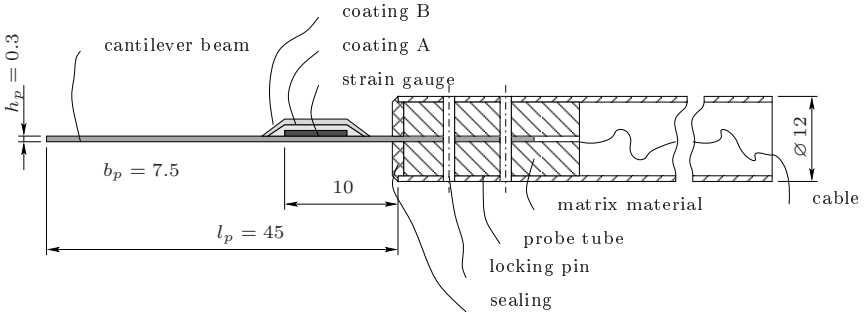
Cross sectional view of the strain gauge cantilever probe with measures in mm
